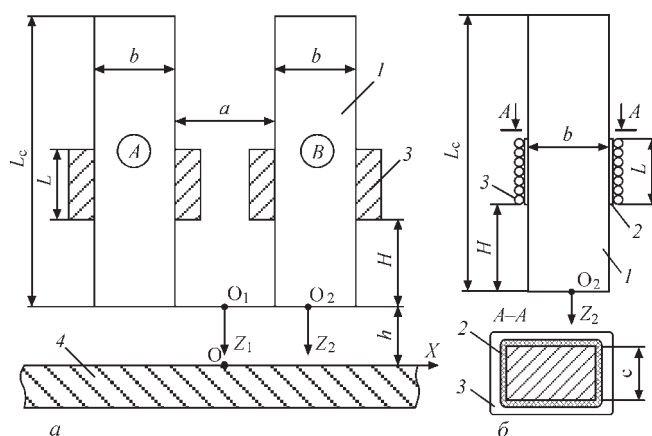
Input device of TMF with two rods (a) and design of rod with winding (b): 1 — rod; 2 — isolator; 3 — winding; 4 — work-piece
